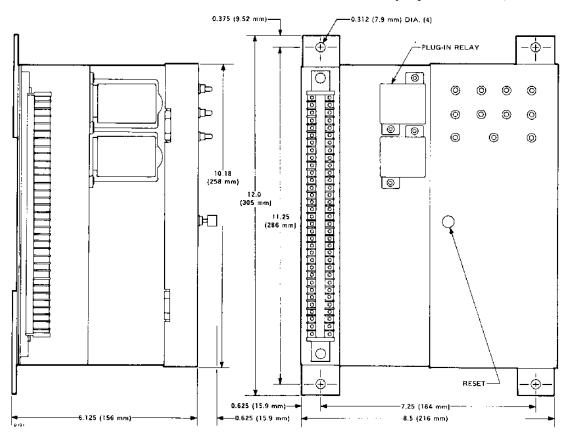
Mounting Dimensions of the R6003 Auxiliary Zone Unit in Inches (mm)
